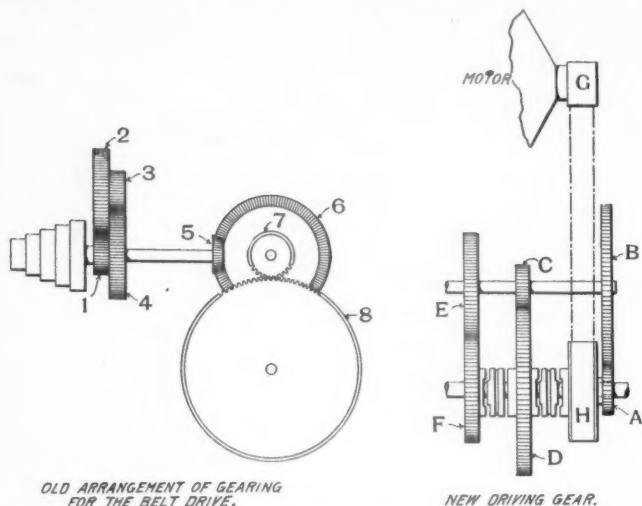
DIAGRAMS OF THE OLD AND NEW ARRANGEMENTS OF GEARING FOR THE DRIVE OF THE 72-INCH MILL, INDICATING THE CHANGES NECESSARY TO BE MADE.
